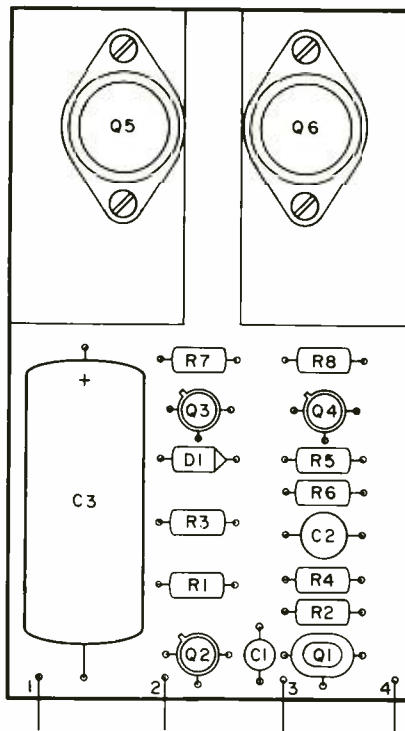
Carefully locate and solder all of the components onto the printed circuit board as shown.
